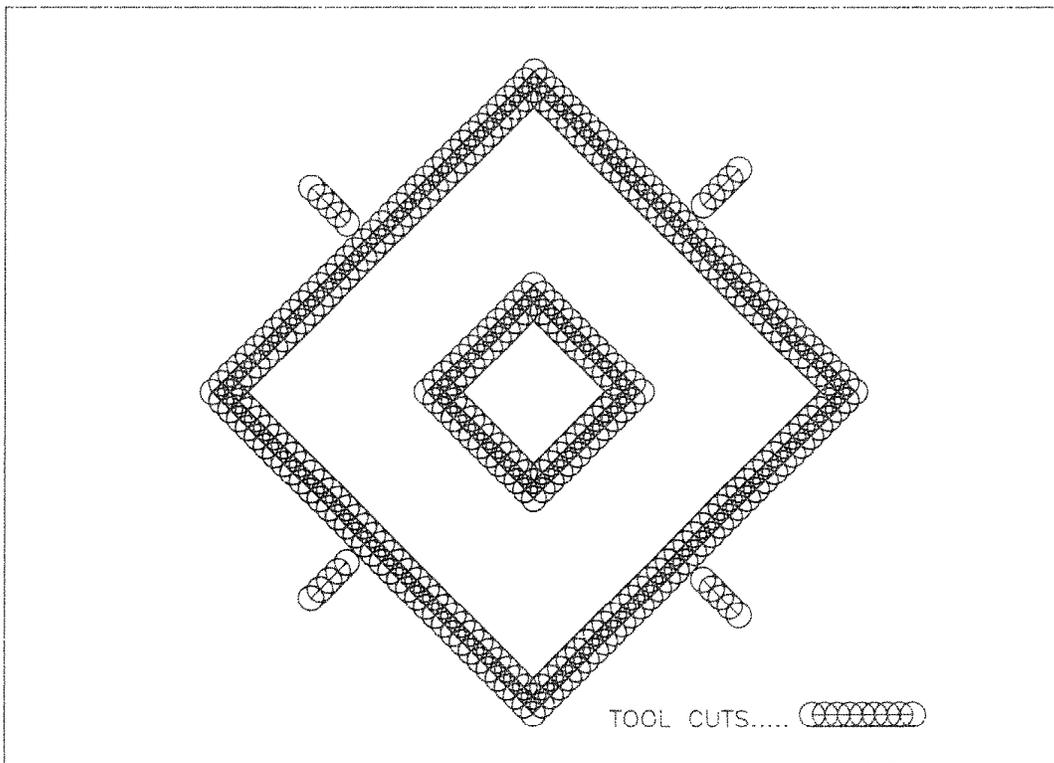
Drawing showing only the actual cuts made in the specified raw material for the 2-inch and 8-inch diamonds used in accuracy evaluation.
